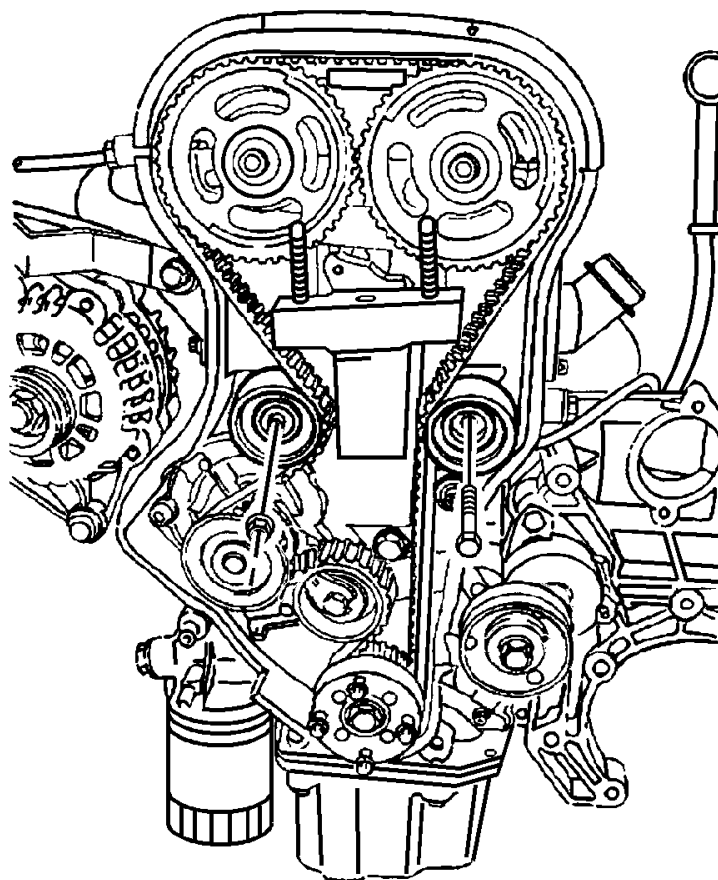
View Of Timing Belt Idler Pulleys And Bolts
